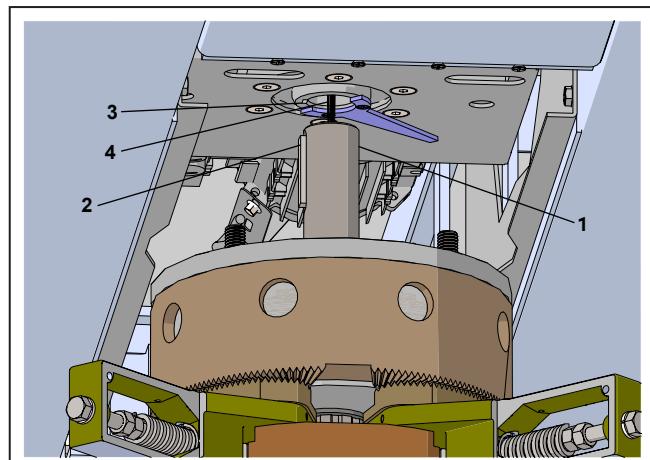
Center shaft positioned under gearbox drive shaft
